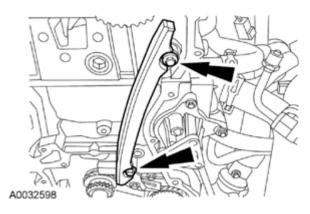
Locating Timing Chain Guide Bolts Courtesy of FORD MOTOR CO.
